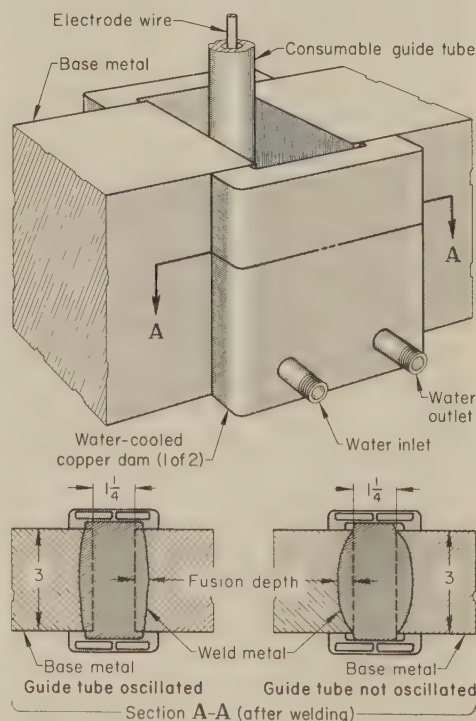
Setup for consumable-guide-tube electroslag welding of 3-in.-thick plates. Note different depths of fusion obtained with and without guide-tube oscillation.
